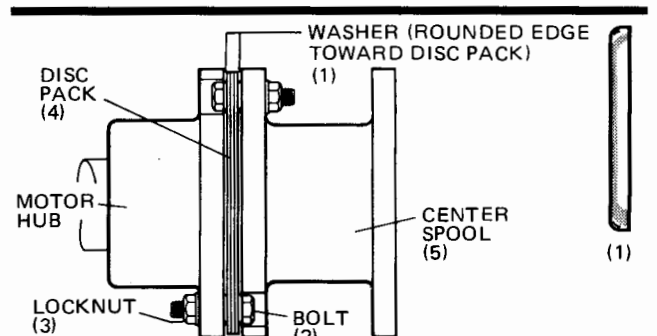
DISC PACK ASSEMBLED TO CENTER SPOOL
